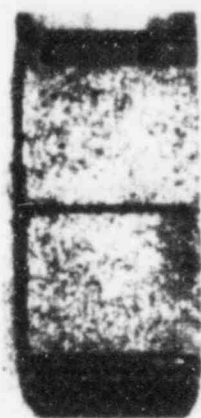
Charpy Impact Specimen Fracture Surfaces for the Connecticut Yankee Reactor Vessel Weld HAZ Metal
